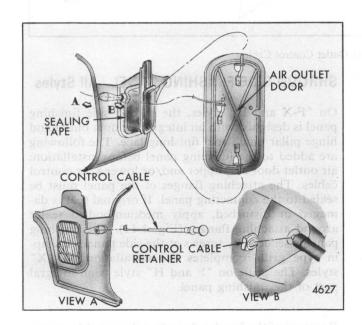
Shroud Side Duct Air Outlet and Door
